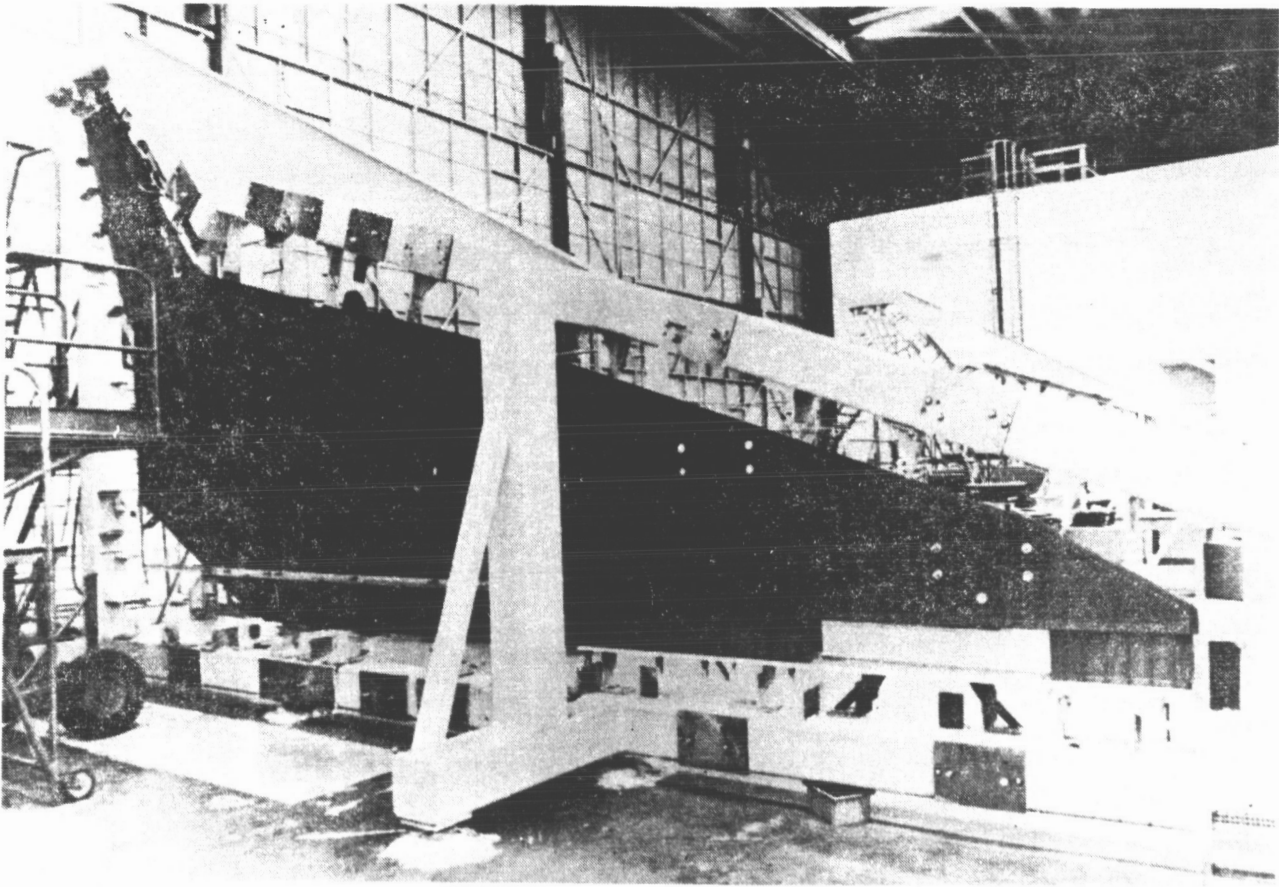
Completed wing structure with internal ribs mechanically fastened to the upper and lower wing skins.
